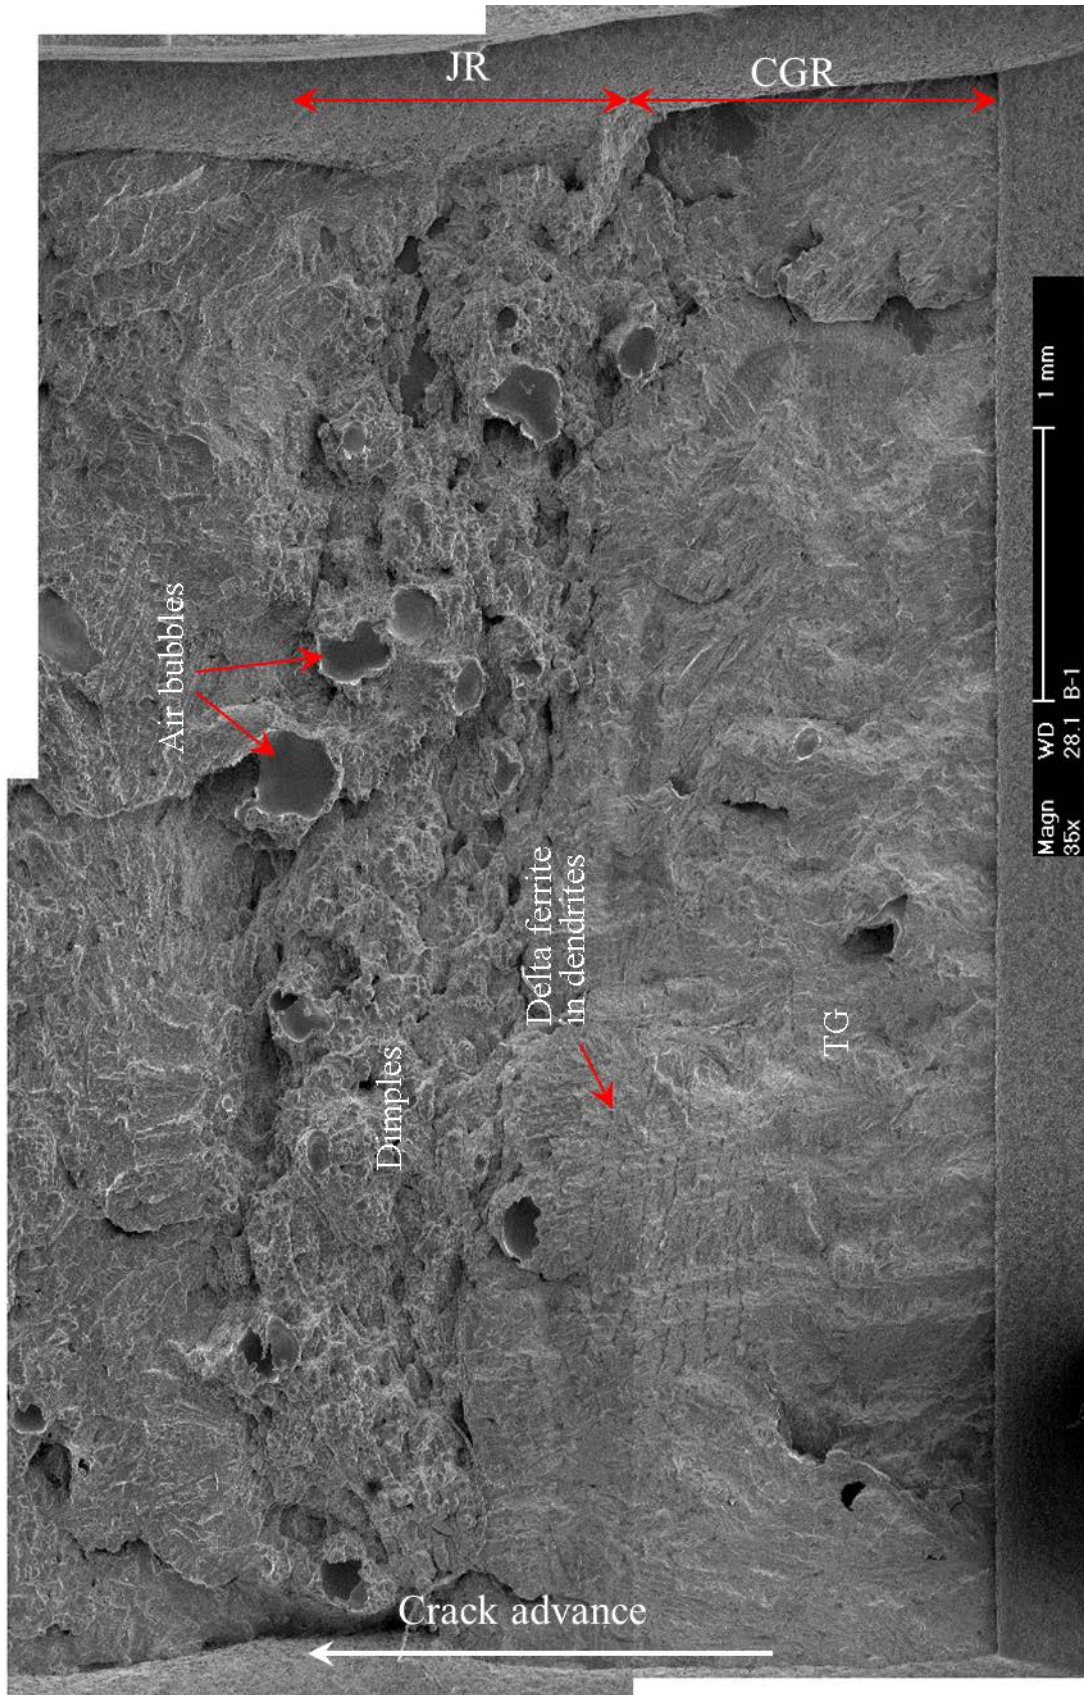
Fracture surface of specimen B-1 tested in PWR water.
